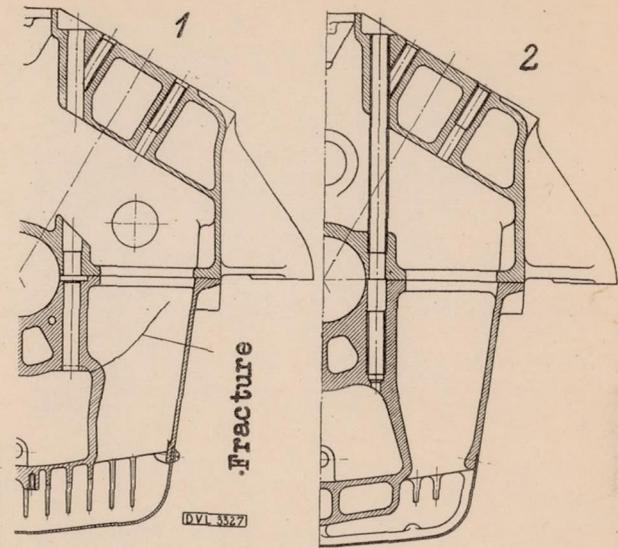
Crankcase cross sections of 12-cylinder in-line engines I.
